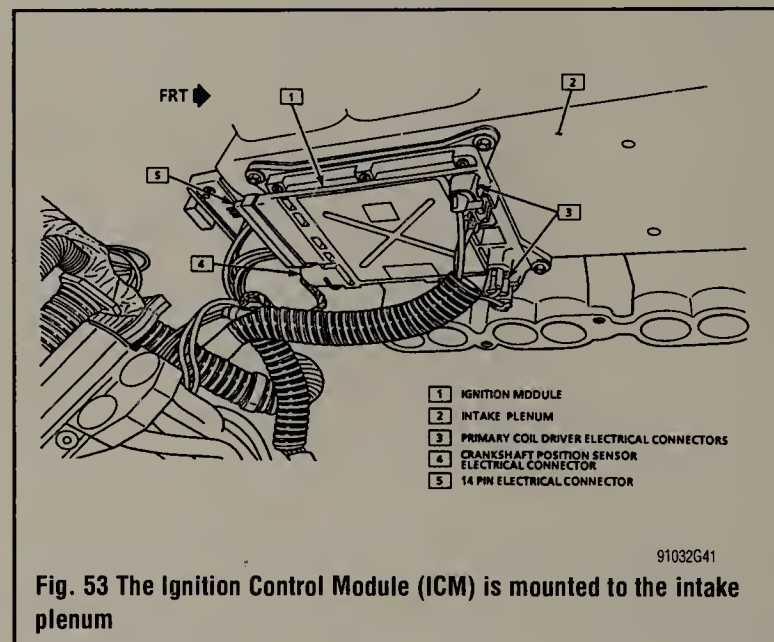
The Ignition Control Module (ICM) is mounted to the intake plenum
